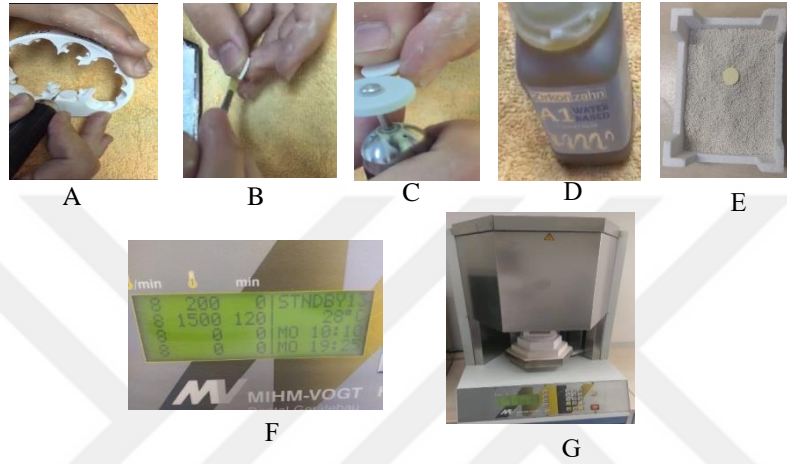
Steps of Zirconia disc fabrication: A) remove the disc from the blank. B) Brush to clean. C) Rubber disc. D) colour liquid. E) Sand. F) Furnace temperature G) Furnace
